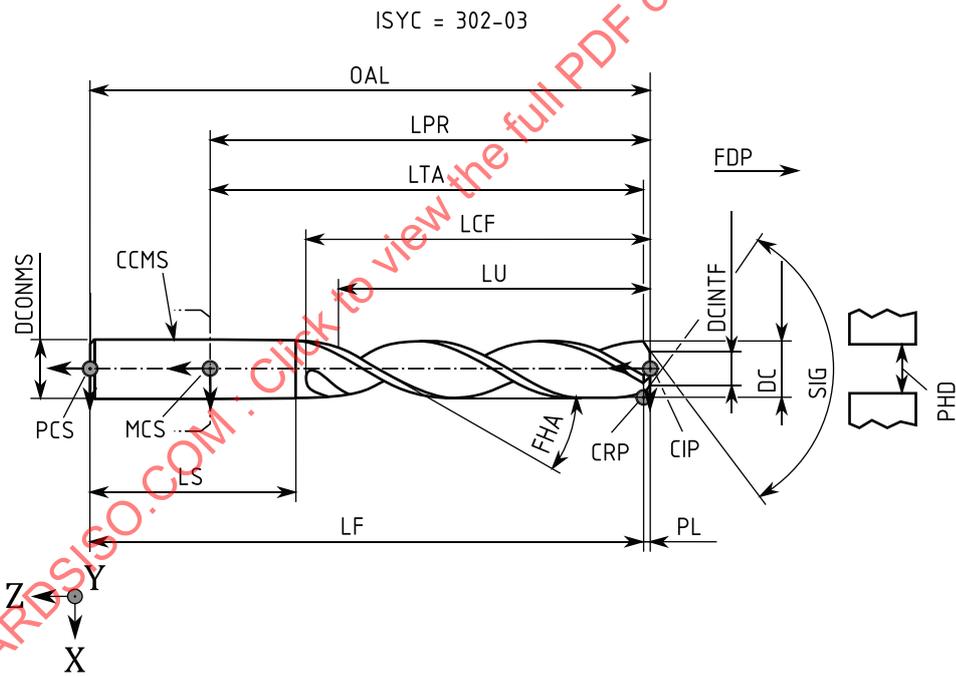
ISYC 302-03 - Core drill, non-centre cutting, cylindrical shank, solid
